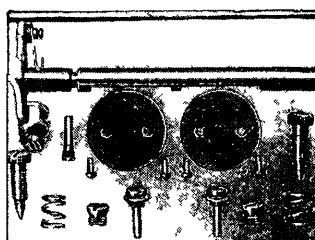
Assemble idle circuit parts. Never reinstall used low speed jet. Use new jet and washer. Be sure to scrape all carbon from casting
